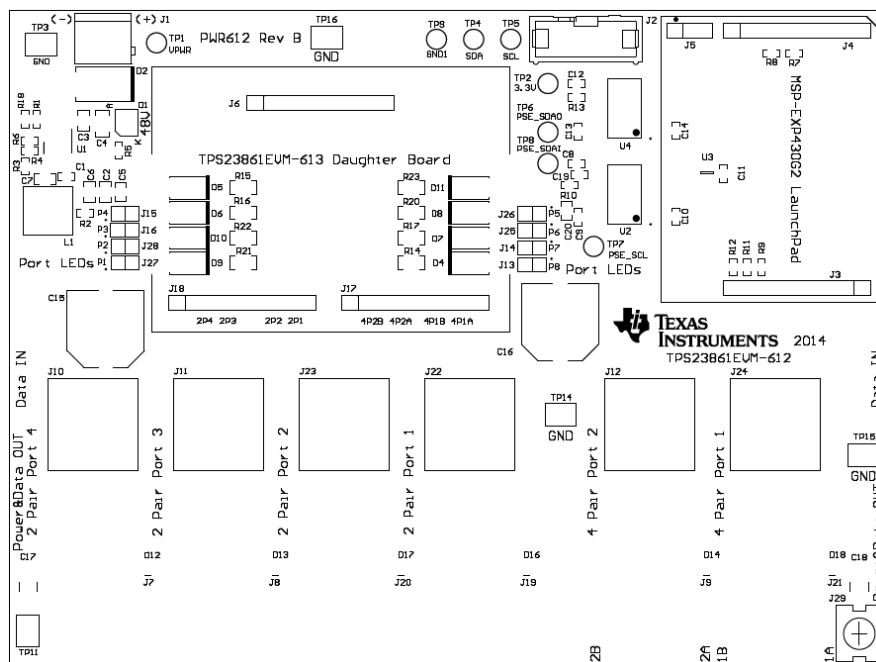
TPS23861EVM-612 (Motherboard) Top Side Assembly
